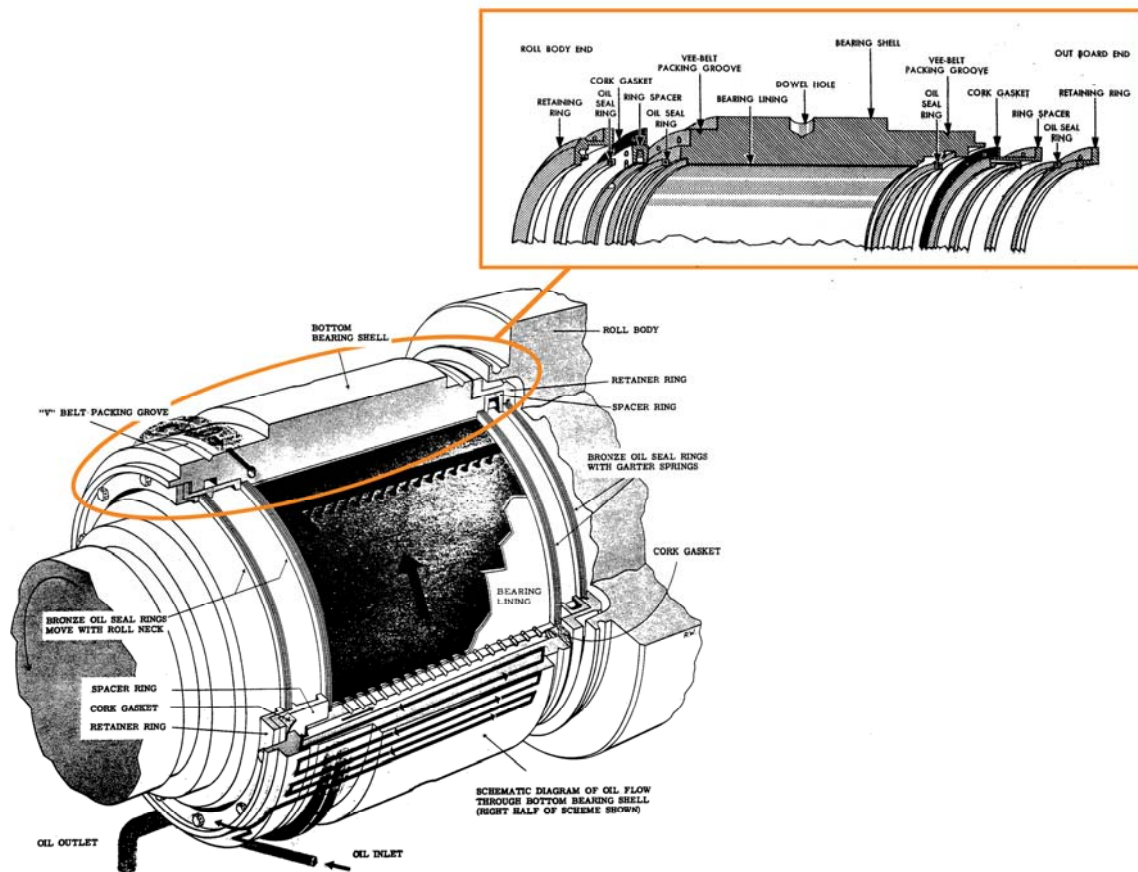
MESTA Iverson Bearing in 5-Stand TCM.
